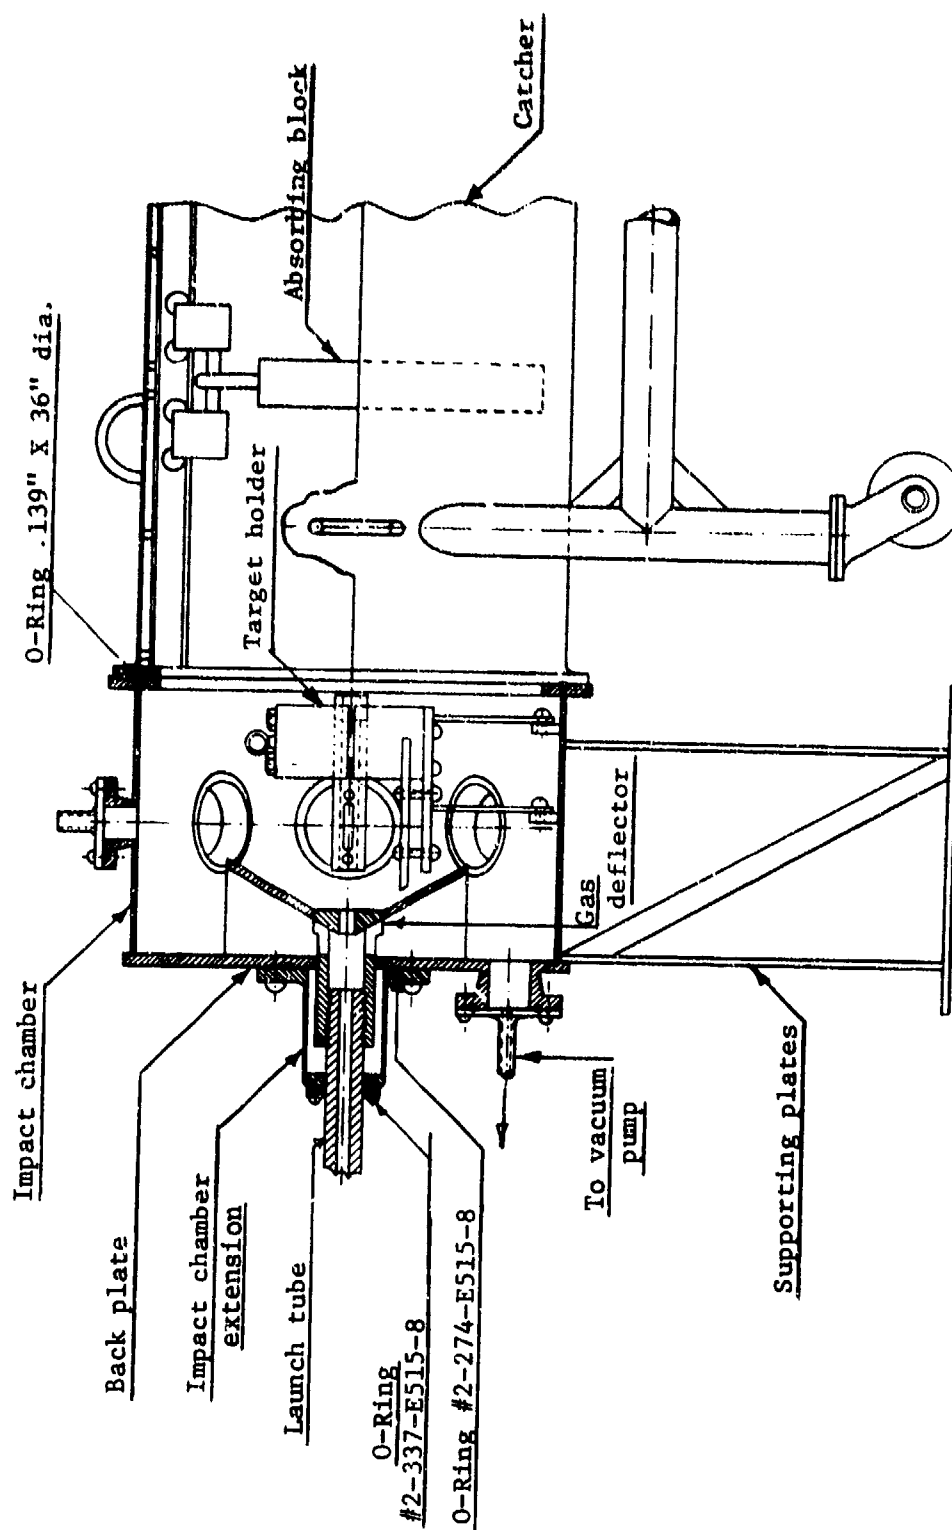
Assembly of launch tube, impact chamber and catcher tank
